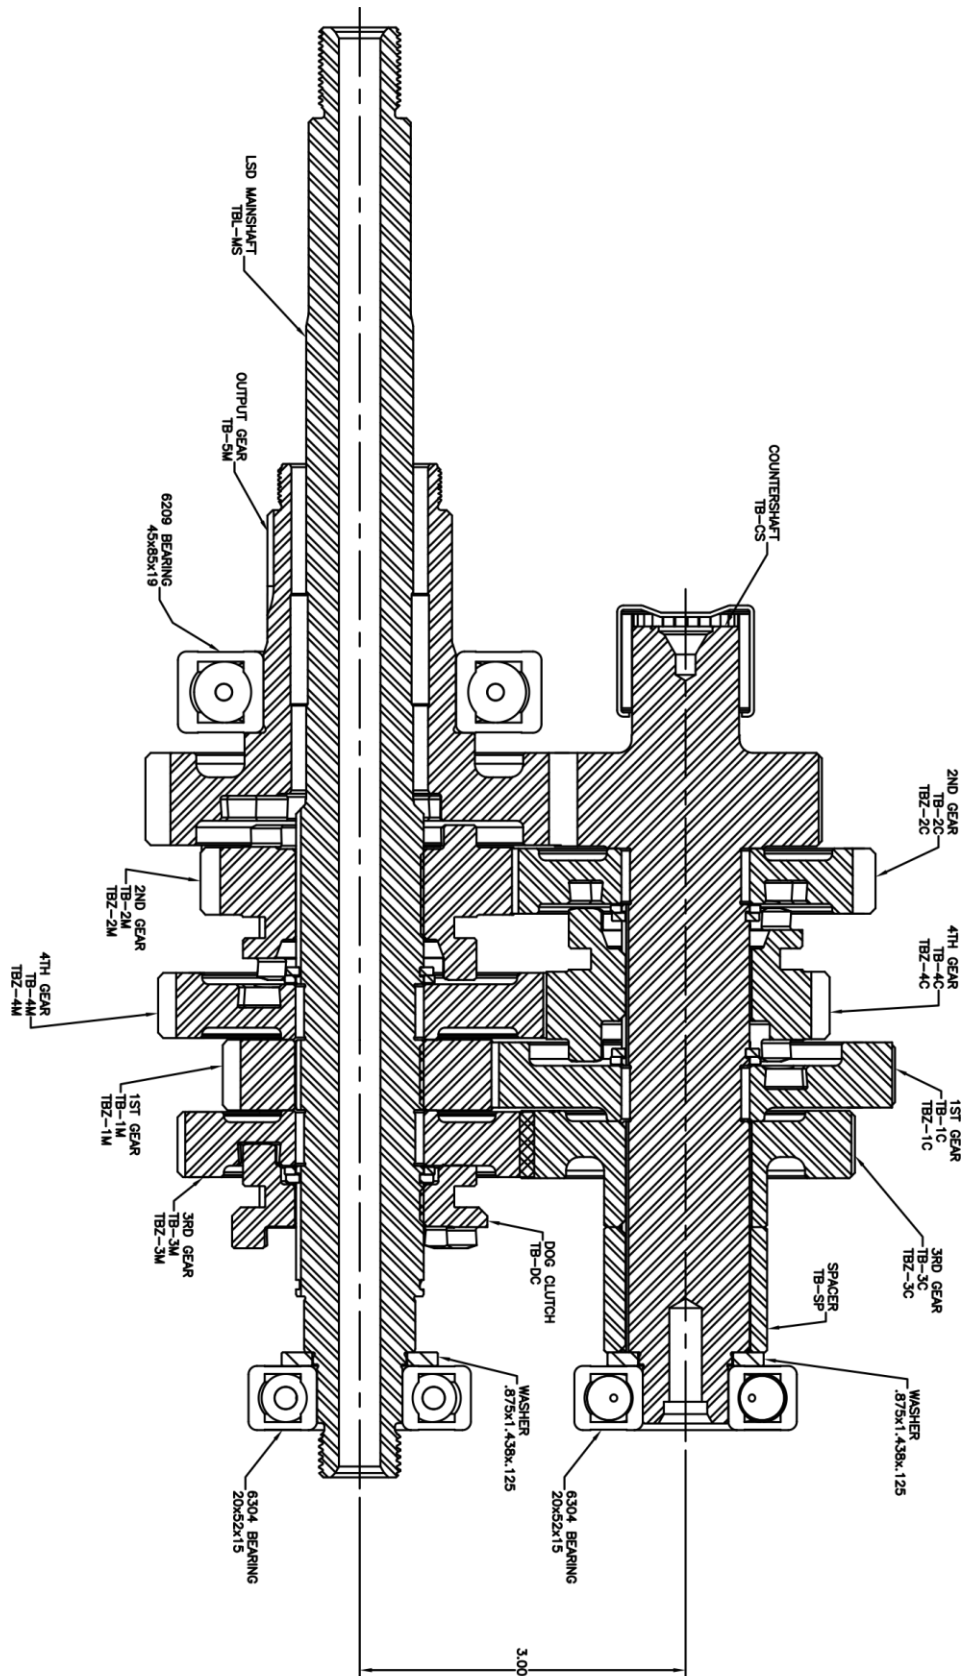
| GEARSET LAYOUT, TORQUEBOX
